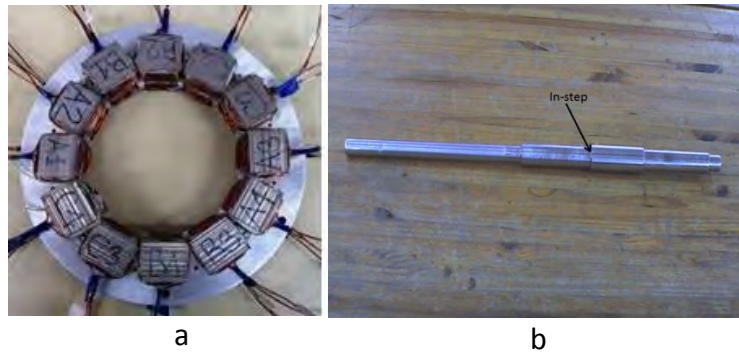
(a) Stator core with coil windings (b) rotor shaft
